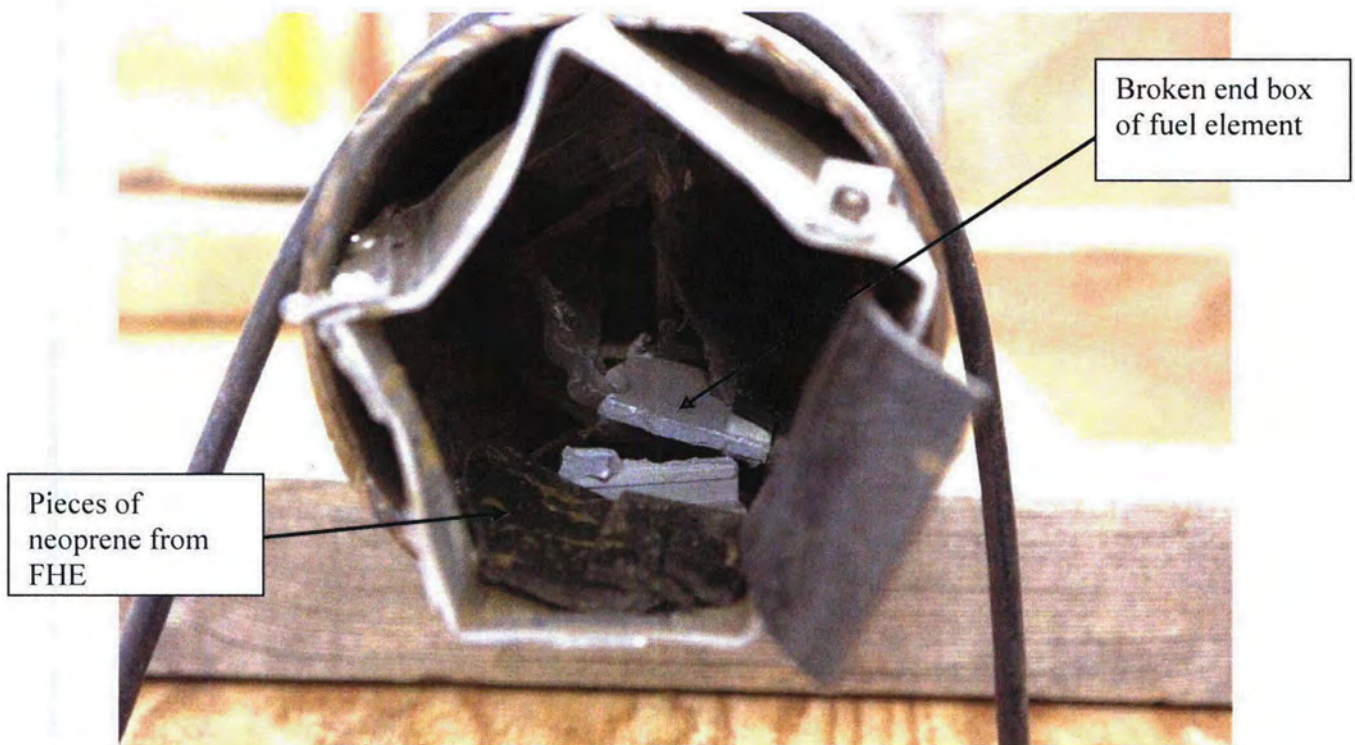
End View (Bottom) of Opened CTU
